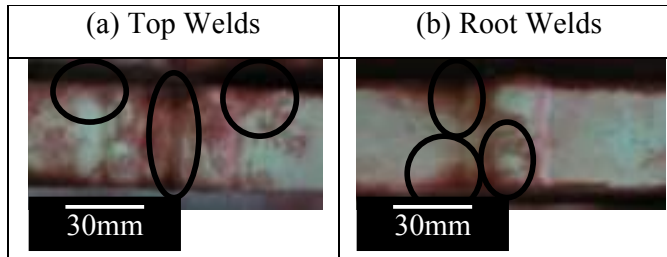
Liquid Penetrant Inspections of Specimen 3
